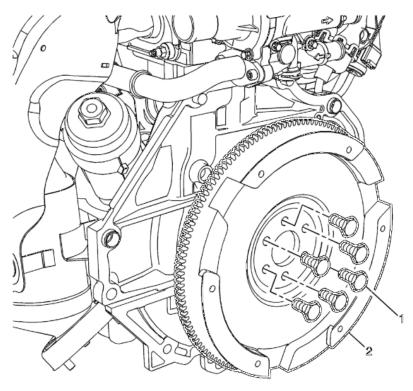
Engine Flywheel And Fasteners Courtesy of GENERAL MOTORS COMPANY
